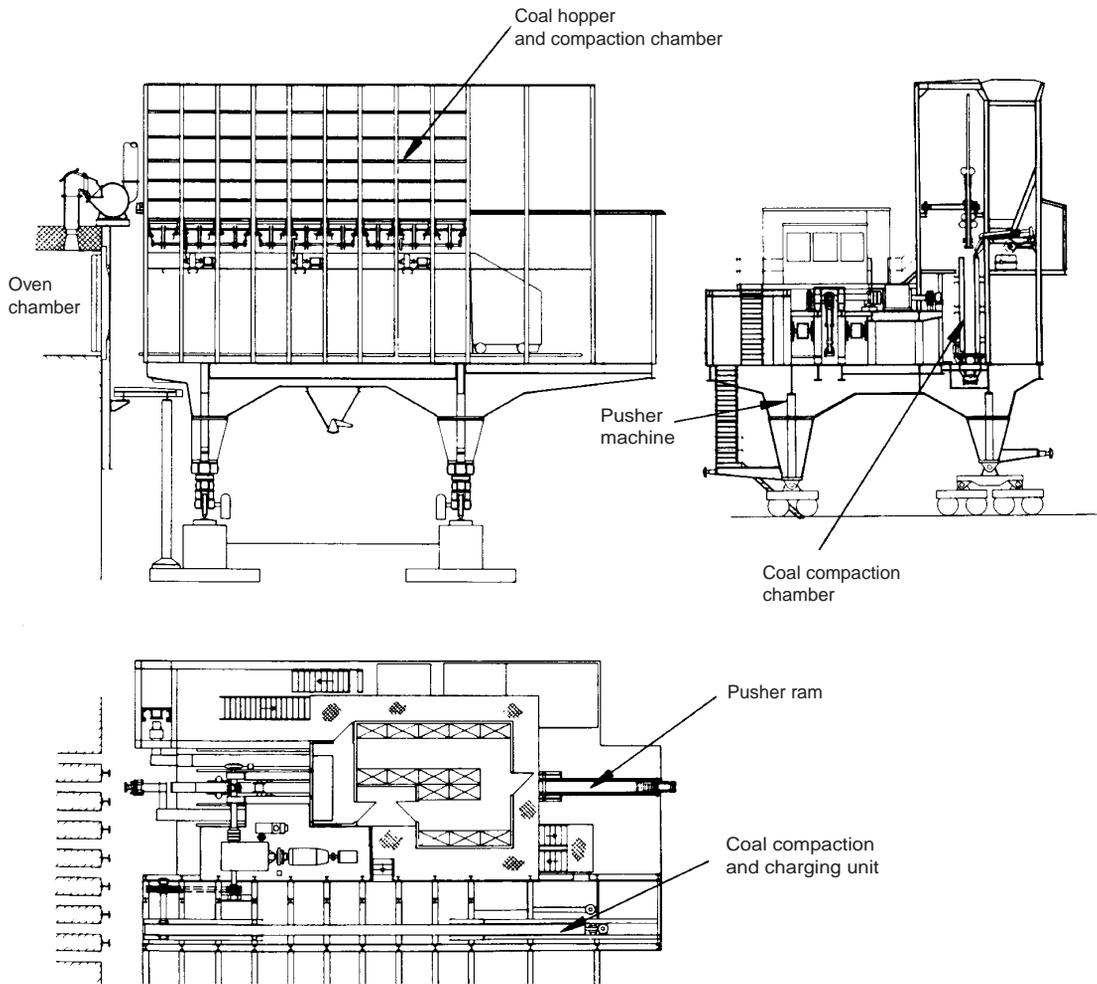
Top, side and end elevations of a coke oven pushing machine incorporating a stamp charging unit.
